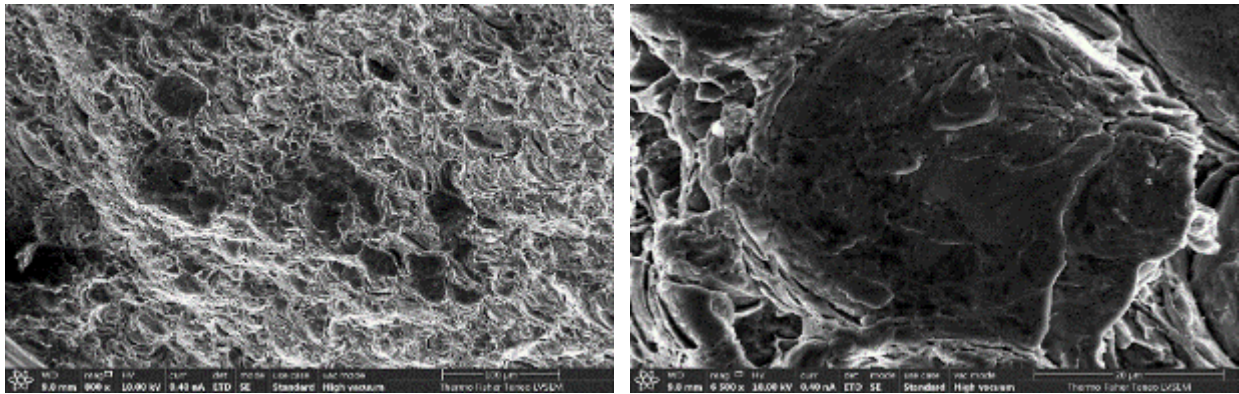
(a) Fracture surface of RH-95% specimen; (b) Magnified view of fracture surface.
